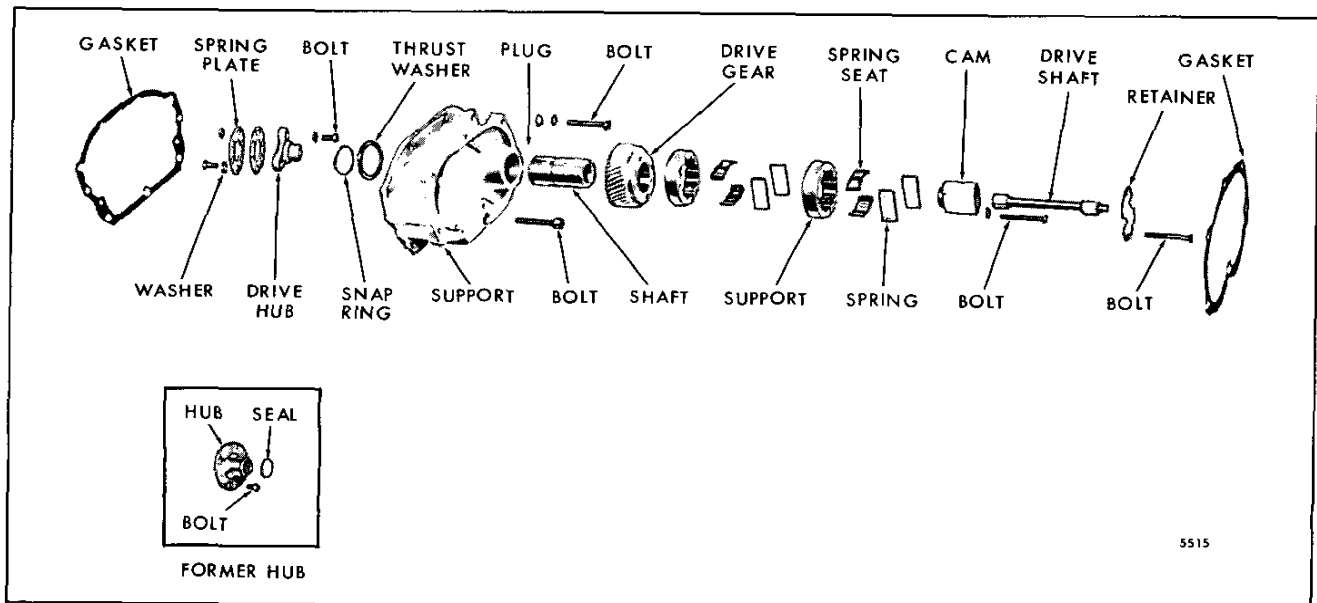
Blower Drive Support Details and Relative Location of Parts (8V-53 Engine)
